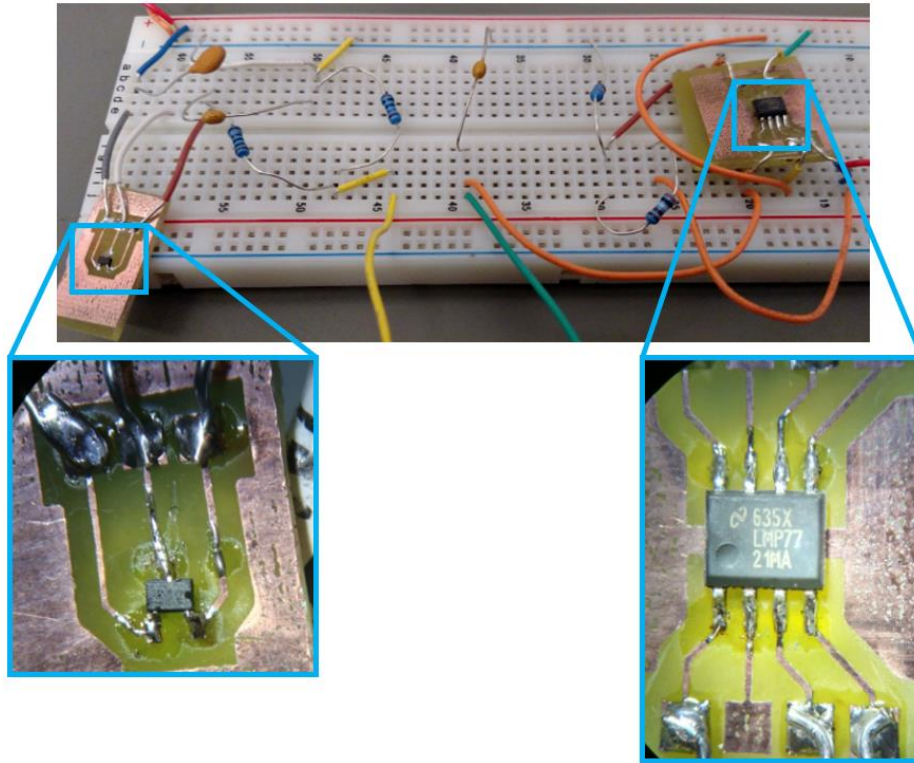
Breadboarded measurement circuit with custom breakout PCBs.
